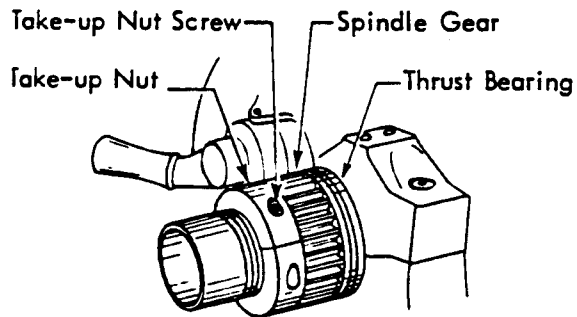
Take-up nut adjustment on same 13" and 14-1/2" lathes.
